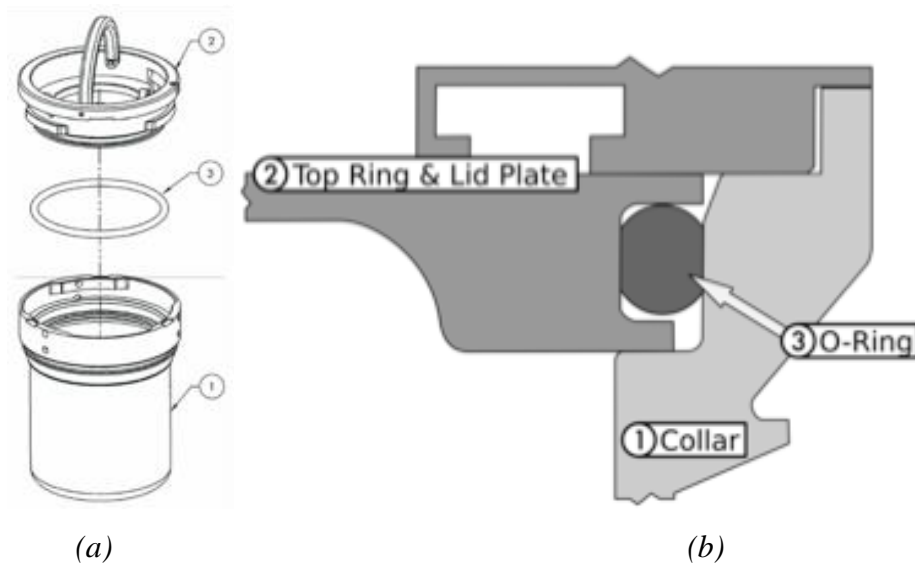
(a) Exploded view of a SAVY-4000 container, with the body (a1), lid, (a2) and O-ring (a3) shown. (b) Cross-section of an assembled container.
